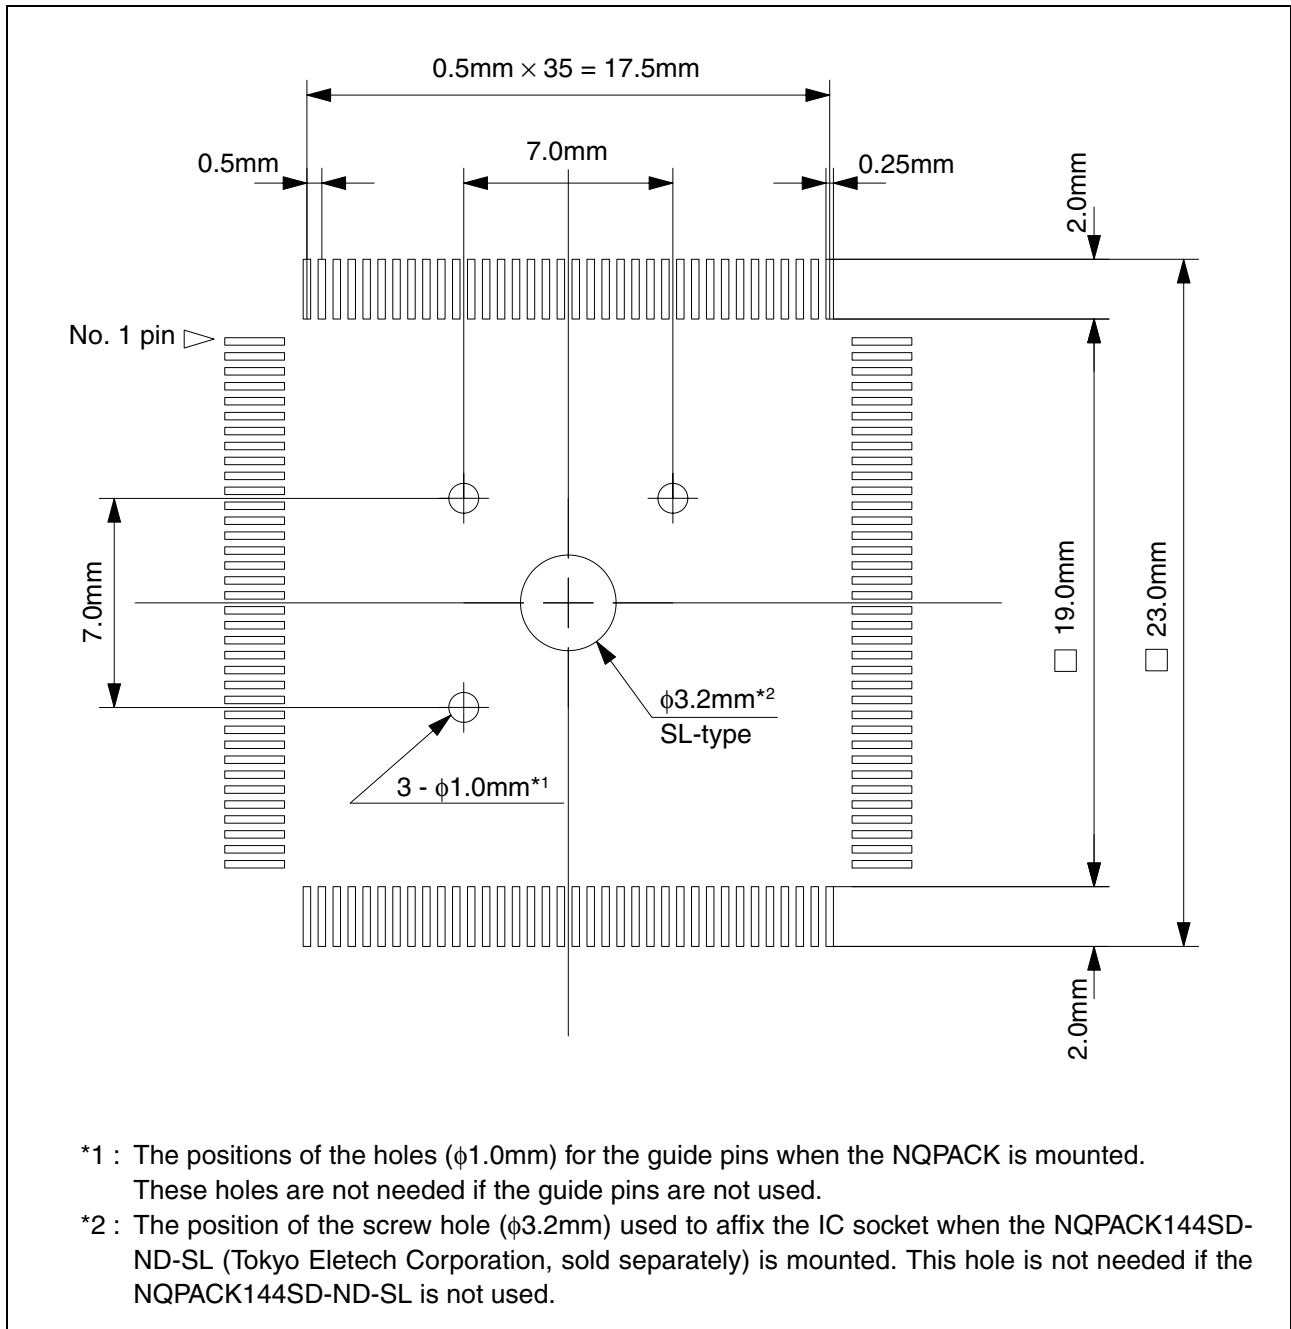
Recommended dimensions of the footprint for mounting the NQPACK
